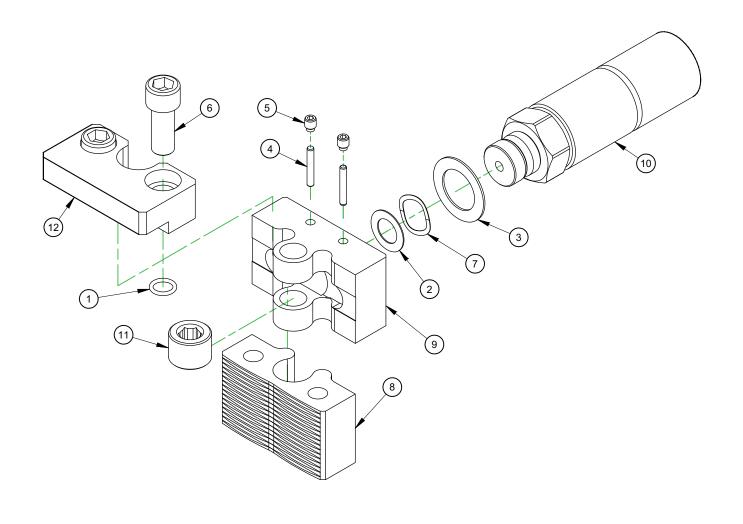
ID CHUCK ASSEMBLY (P/N 57881)
